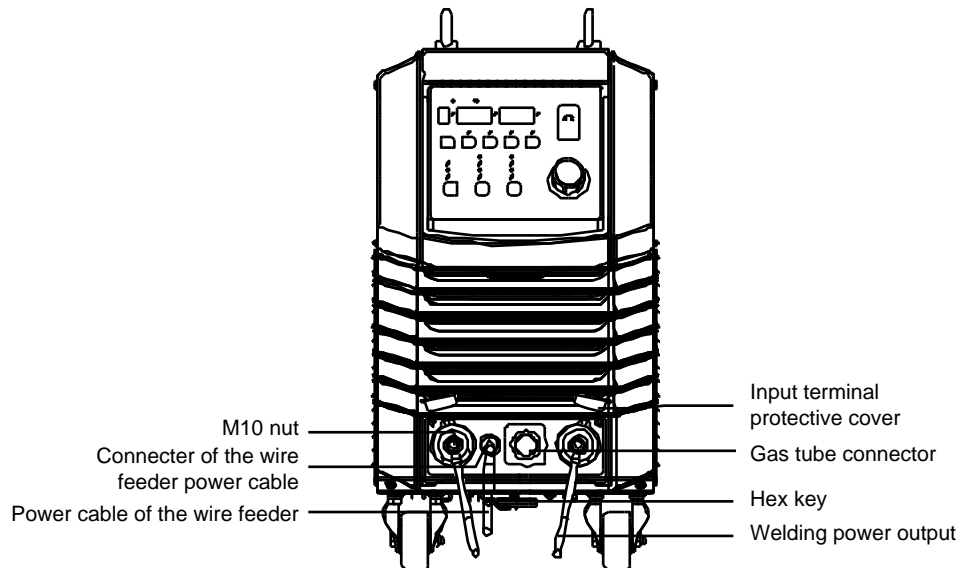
Schematic diagram of connecting the positive and negative output terminals with the welding power cables of the wire feeder and workpiece
